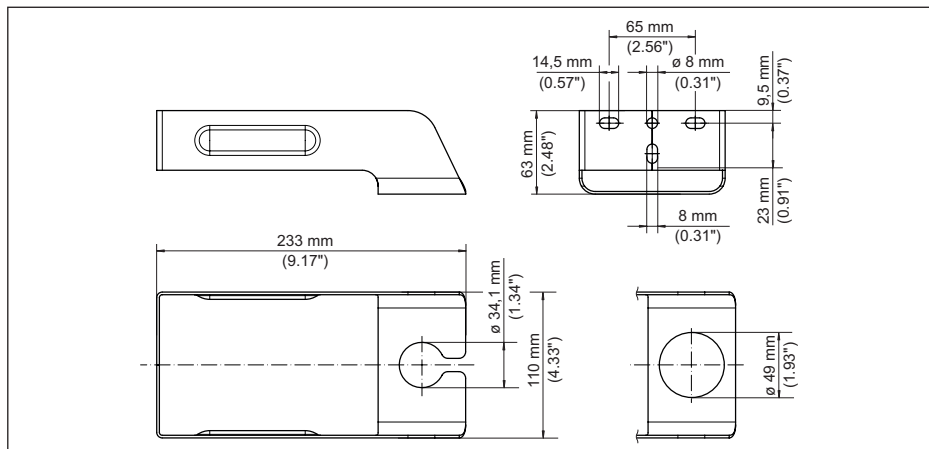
Mounting strap for wall mounting, rigid - bracket 200 mm
